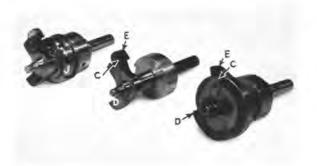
Left, new cam with bearing assembled. Center, new cam, including spring connector. Right, standard cam.
